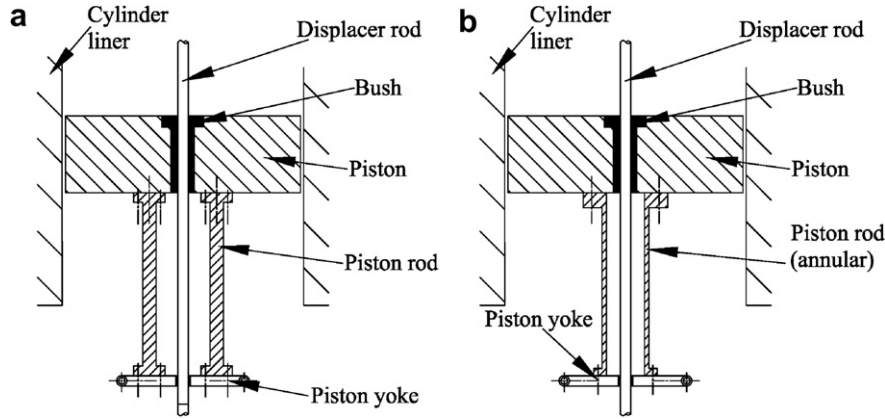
(a) Piston and two piston rod arrangement (b) Piston and annular piston rod arrangement.
